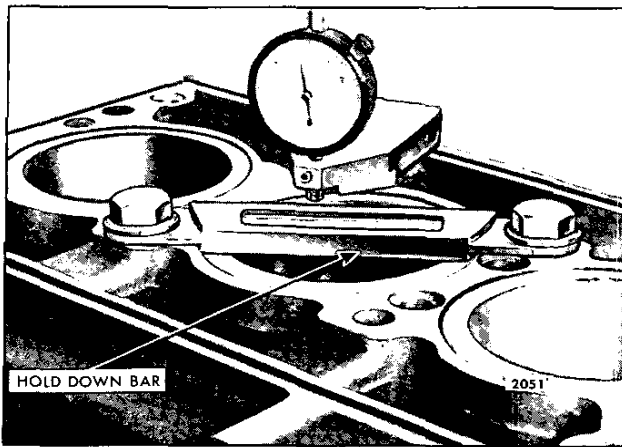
Checking Distance of Liner Flange Below Top Face of Block Using J 22273-01 and Hold-Down Tool J 21793-B
